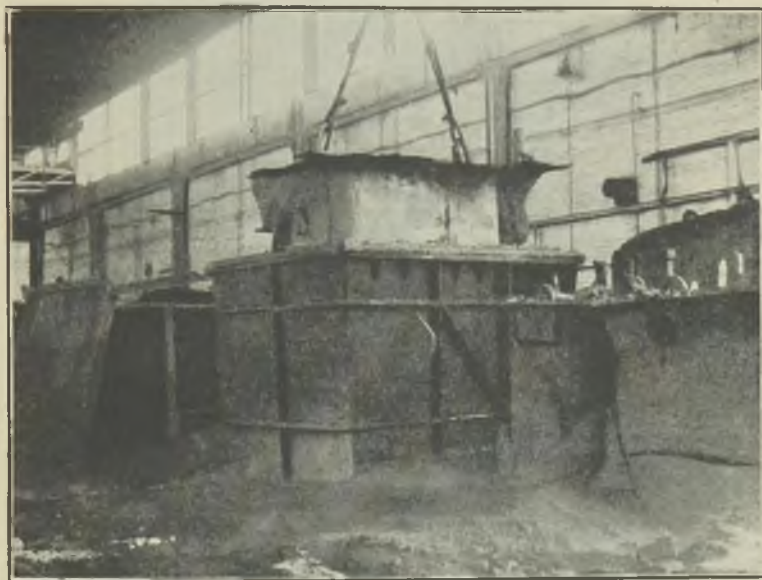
SHOWS A 16-TON CASTING BEING REMOVED FROM THE MOULD.
